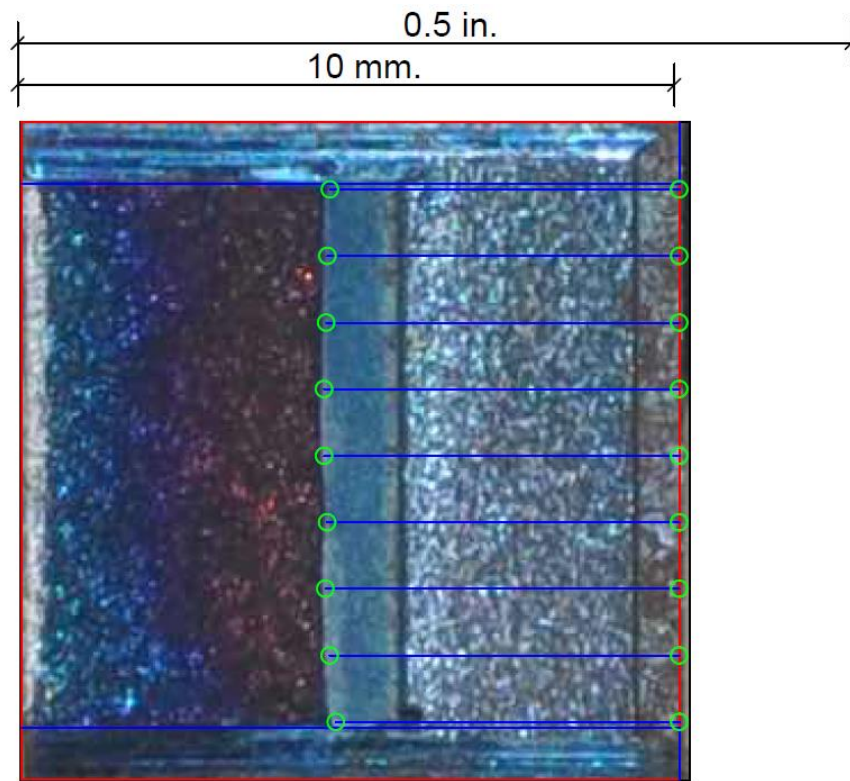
Specimen D4' Fracture Surface
